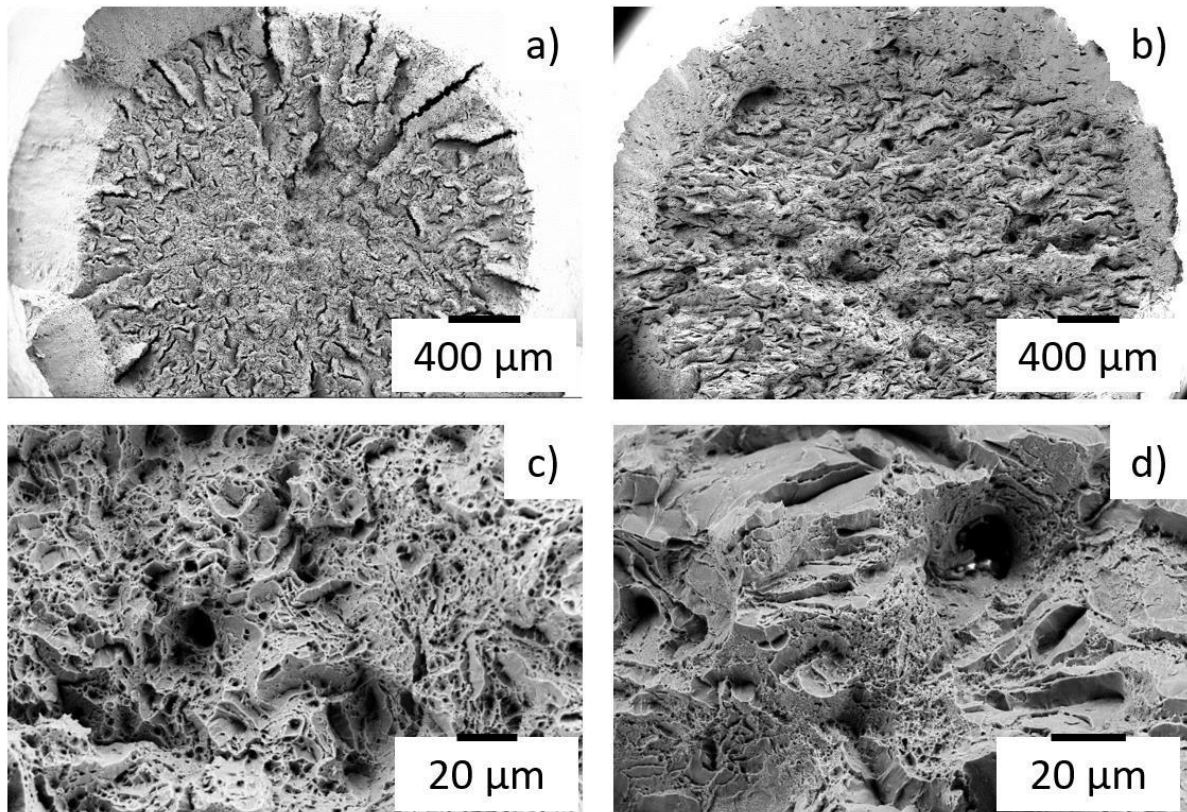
3: Fracture surfaces after tensile tests in air of smooth specimens of: (a), (c) wrought steel showing a typical ductile cup-and-cone fracture and (b), (d) SLM-ed steel showing ductile behavior with small brittle cleavage zones.
